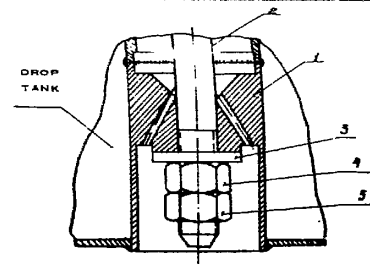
ATTACHMENT OF DROP TANK EYE-BOLT
